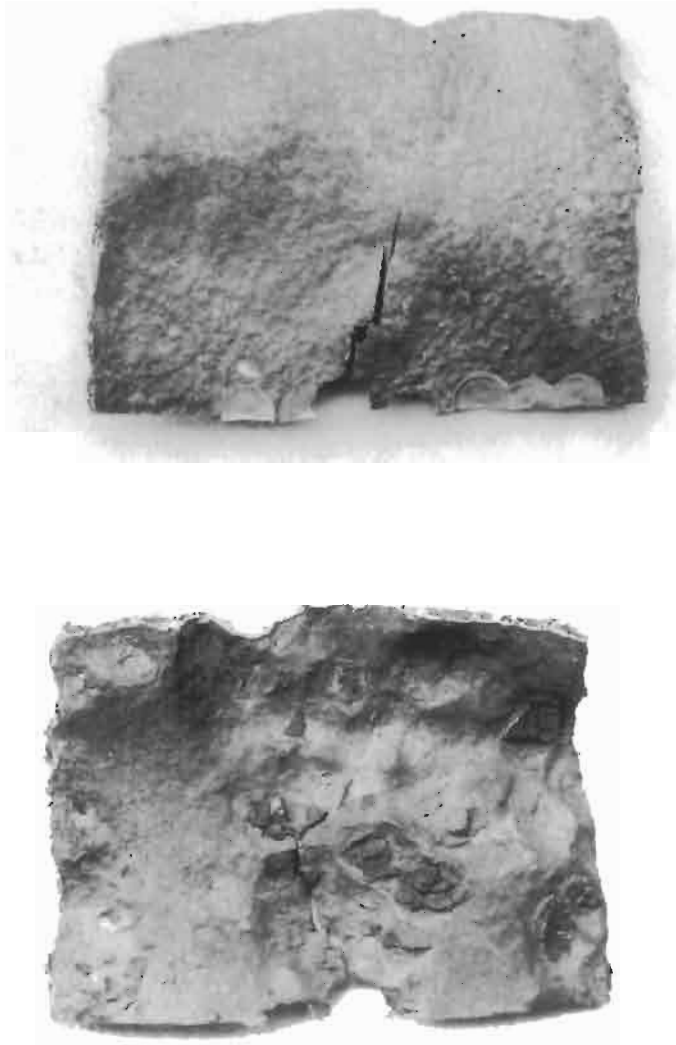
Appearance of internal and external surfaces of the cracked tube specimen D_2 .
